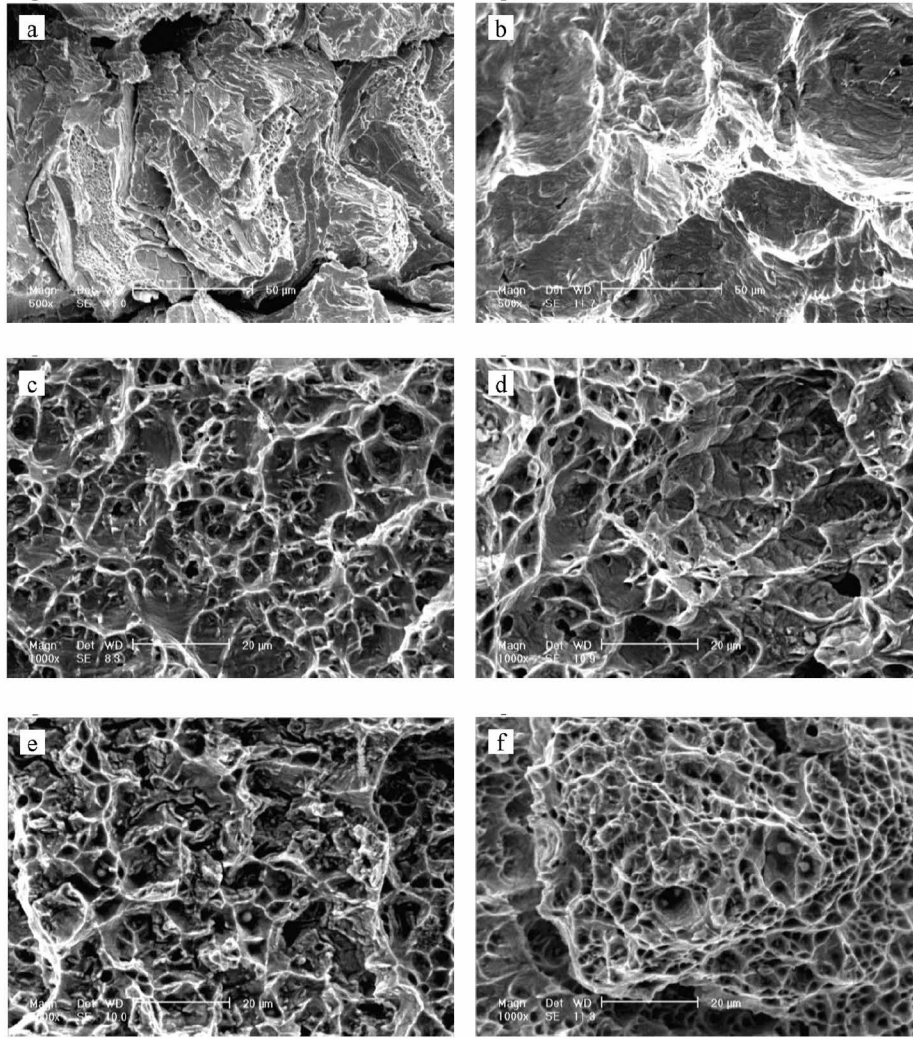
SEM fractographs of fractured Charpy impact specimens: (a) Inconel 657 base metal, (b) 310 SS base metal, (c) Inconel 82 weld metal, (d) Inconel A weld metal, (e) Inconel 617 weld metal and (f) 310 SS weld metal.
